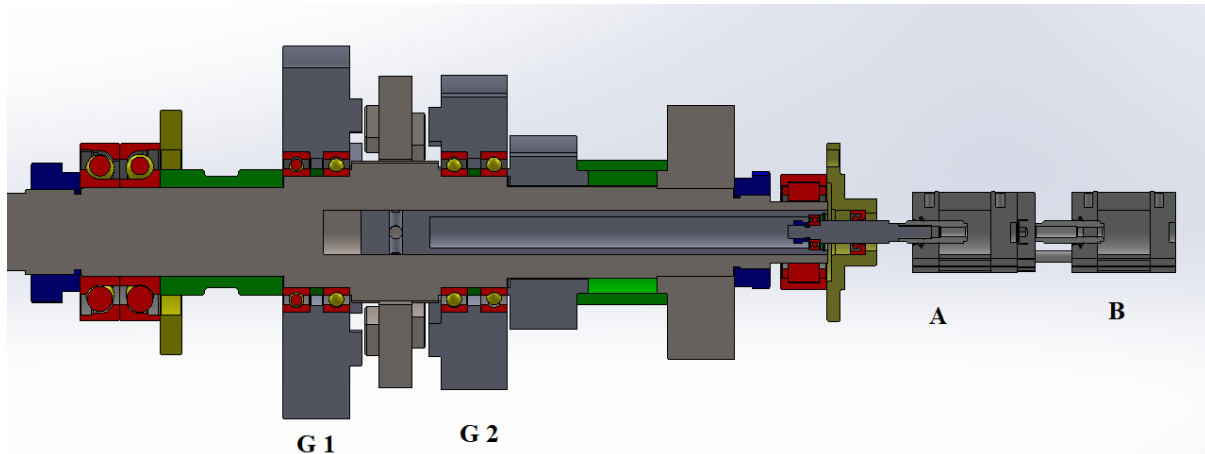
Cut Section of the Corbellati Missile Gear Box Primary Shaft
